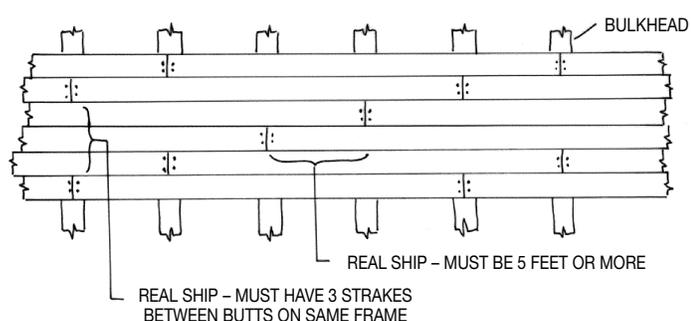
STAGGERING THE PLANKING BUTTS
